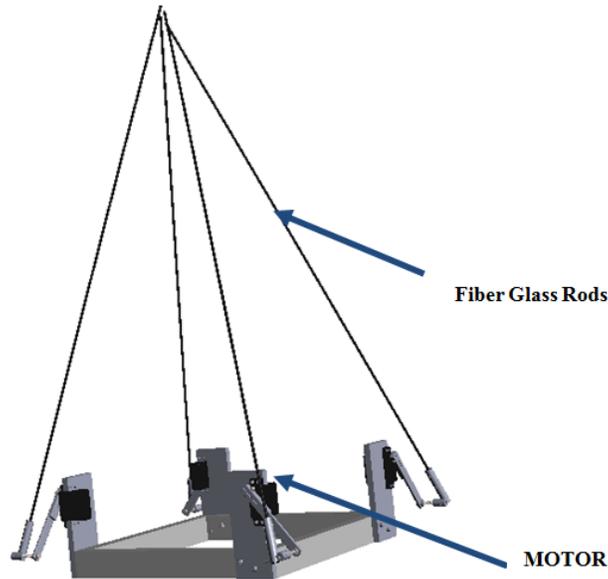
3D Initial Design of Base drive Unit and Arm Structure
